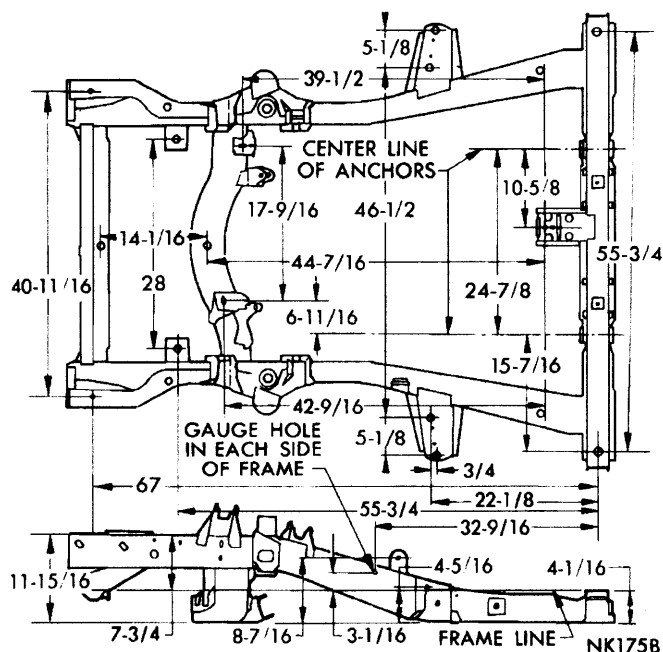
Frame Dimensions—Fury 6-Cylinder
